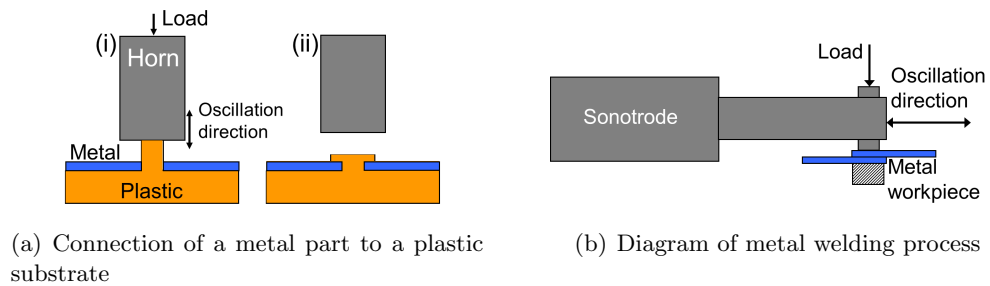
Ultrasonic welding processes [2,33]
